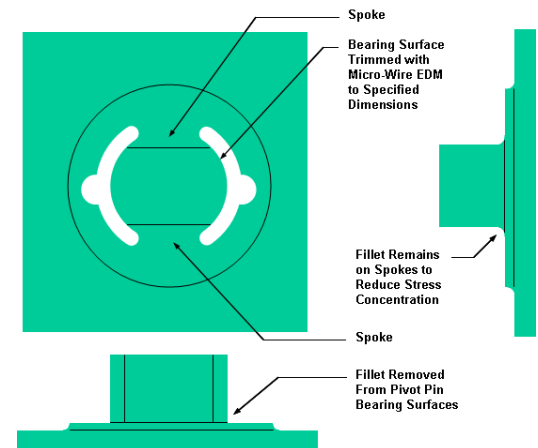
Second Step: Create an Integrated Pivot Pin by Trimming the Bearing Surfaces with a Micro-Wire EDM Process
